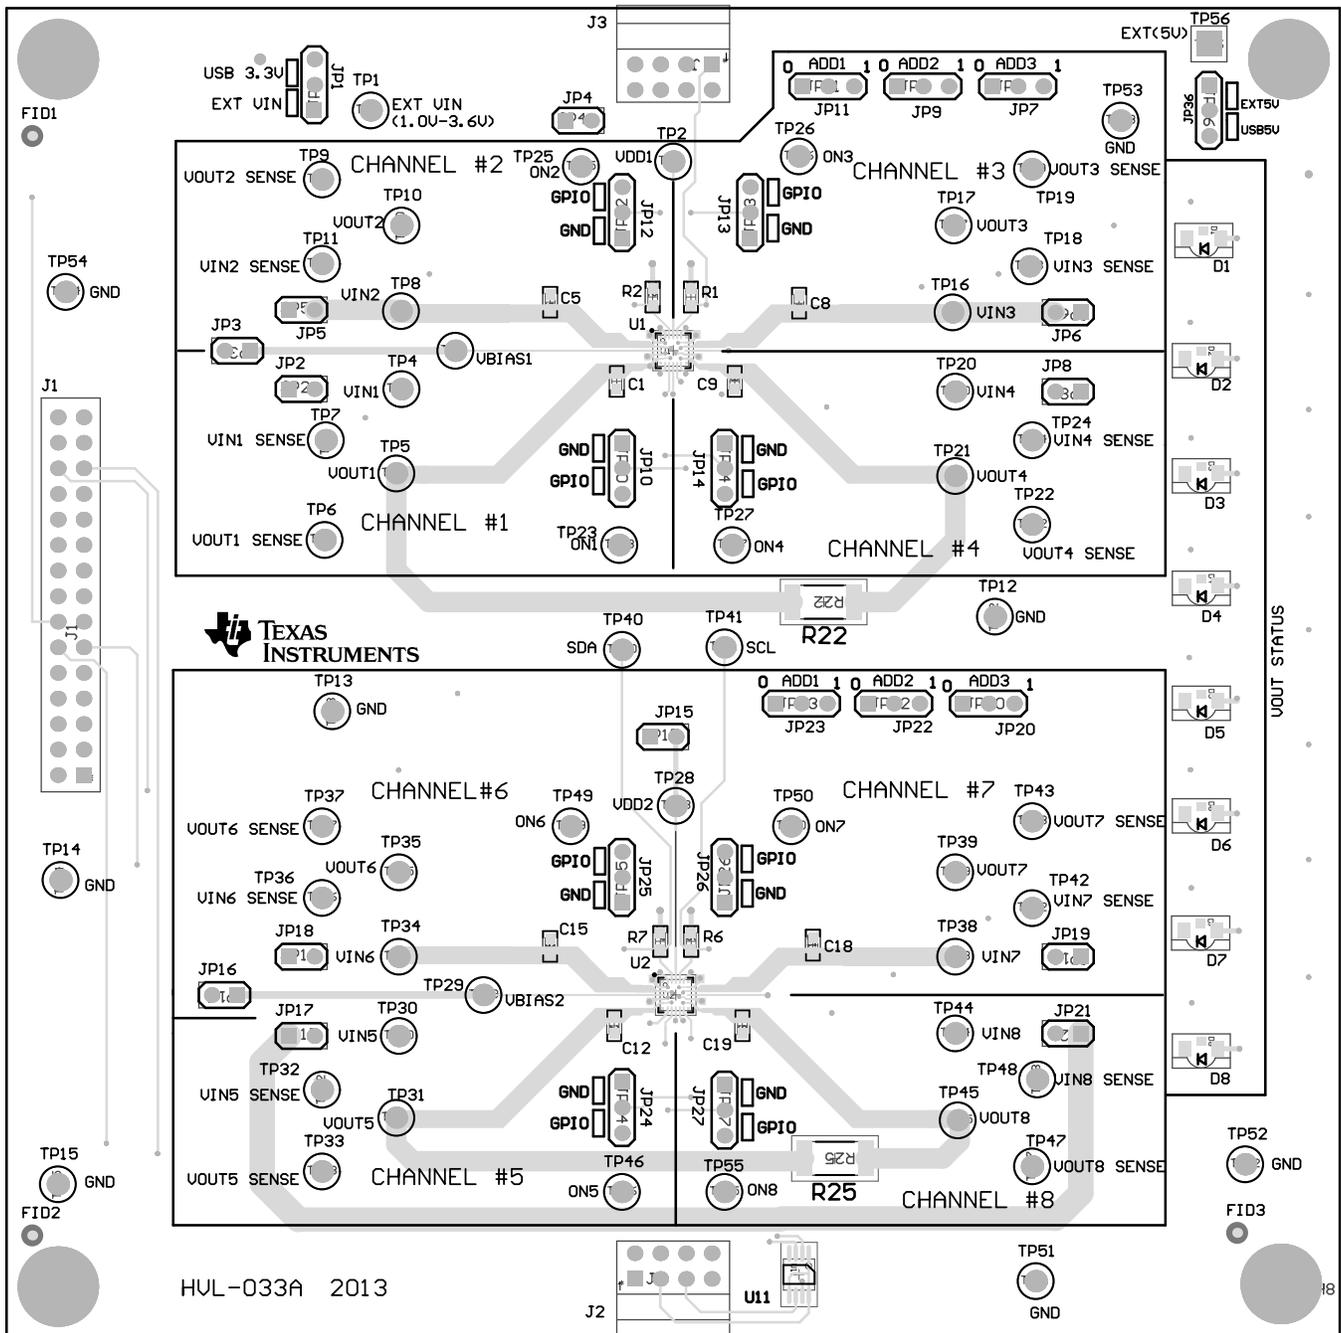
I²C Load Switch EVM Board Top Side (Minus GND Pour)
